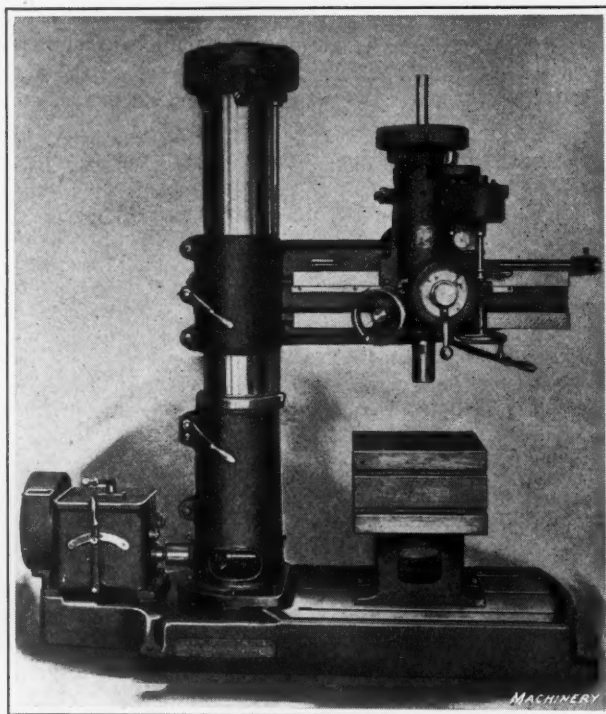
Radial Drilling Machine built in 2½-, 3- and 3½-foot Sizes by the Morris Machine Tool Co.
